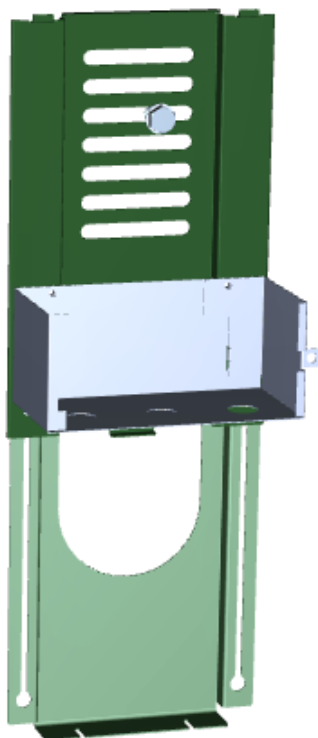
Attach the Conduit Housing to the Pad Mounting Bracket
